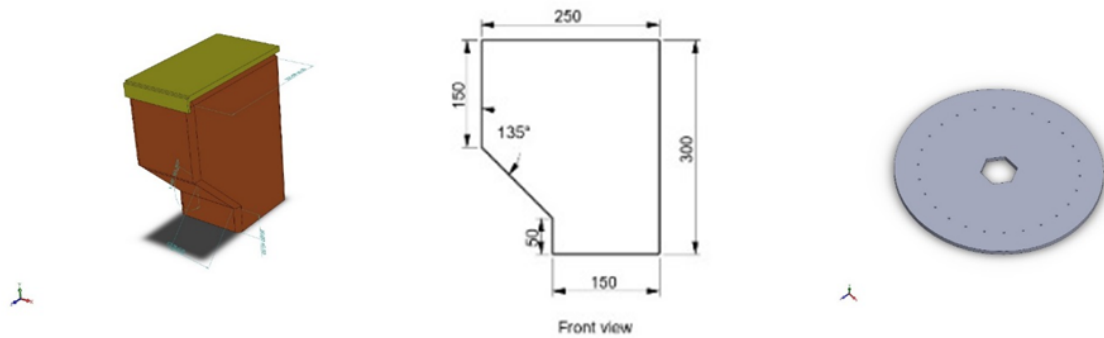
Design of hopper and seed plate for pneumatic meter mechanism
